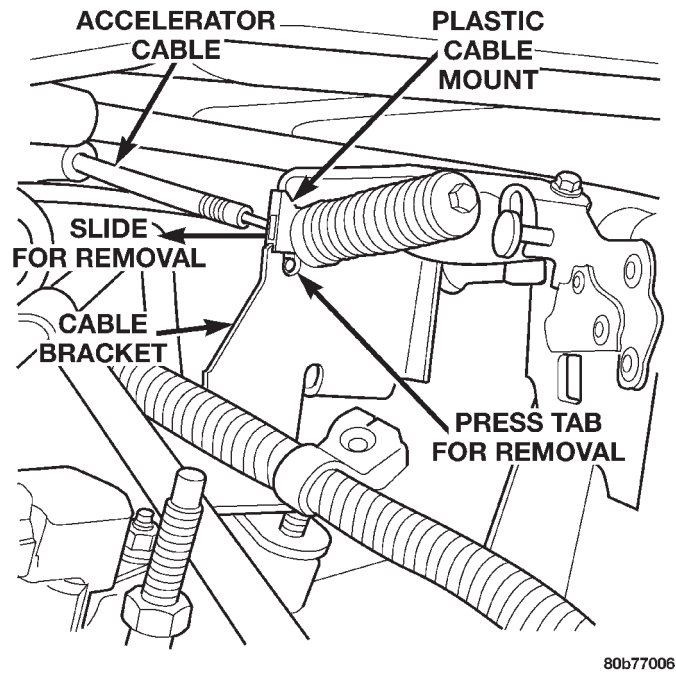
Accelerator Cable Release Tab—4.7L V-8 Engine
